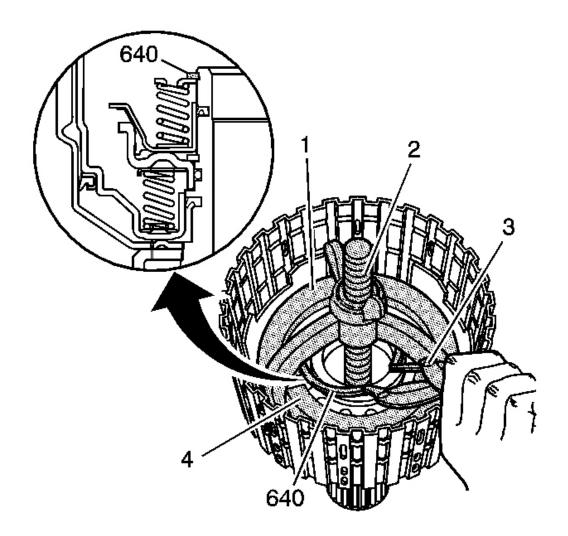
Compressing The Third Clutch Spring Retainer And Guide Assembly Using J 23327, J 25018-A & J 8059 Courtesy of GENERAL MOTORS CORP.
